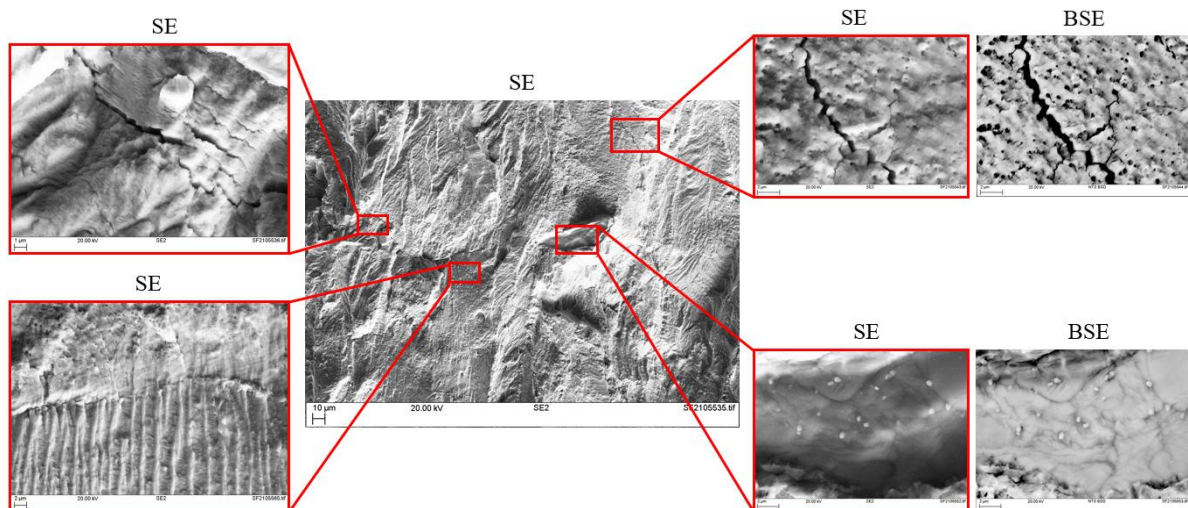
SEM view of specimen N°2 fracture surface, magnified view of the interface in SE and BSE
